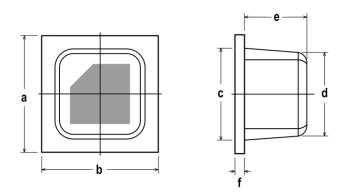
Packaging outline drawing of the SCD4x: (left) top view and (right) side view. Nominal dimensions and tolerances are listed in millimeters.
